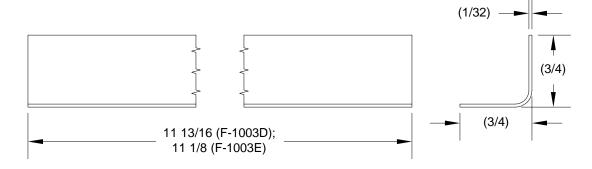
FABRICATE INST PANEL ATTACH FLANGES
